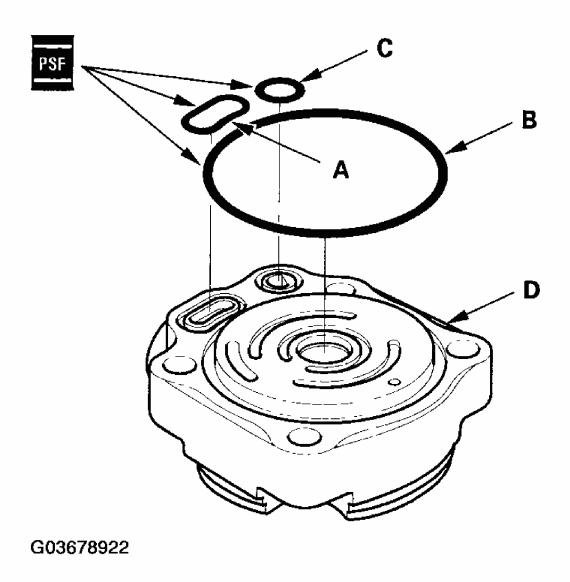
Positioning Cover Seals And O-Ring Into Grooves On Cover Courtesy of AMERICAN HONDA MOTOR CO., INC.
